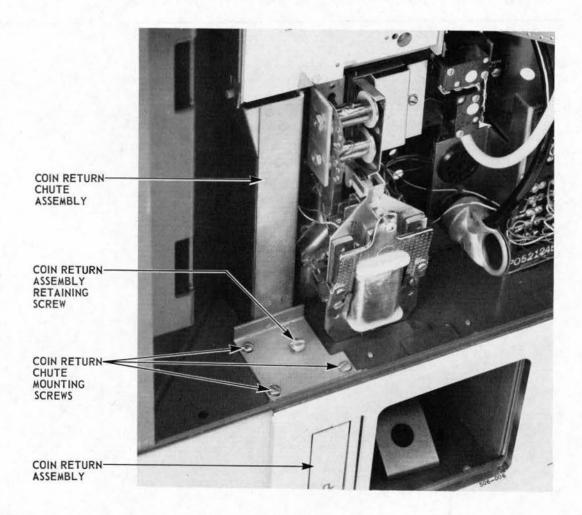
Mounting Arrangement for Coin Return Chute Assembly
